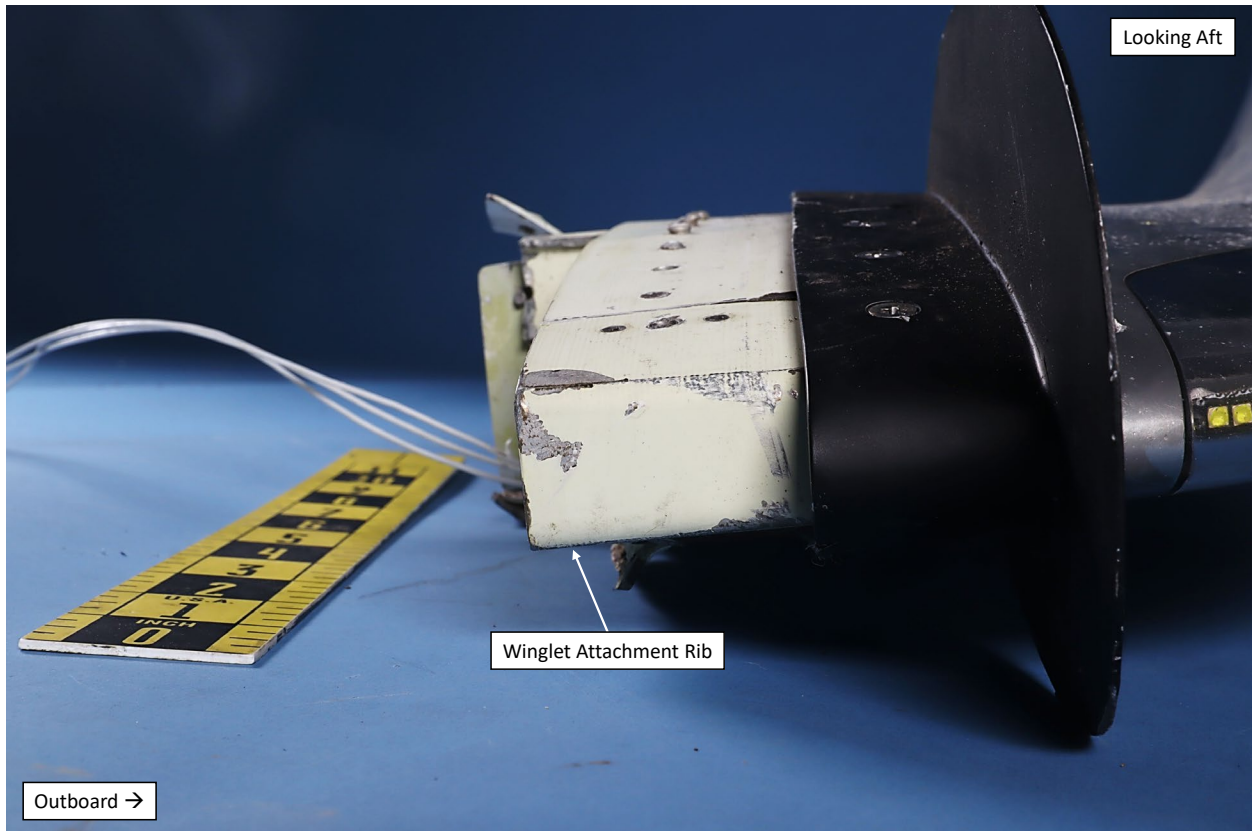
Photograph of the forward end of the winglet attachment rib showing corresponding witness marks (chipped/scraped primer and dark gray contact marks) to the inner surface of the leading edge component.
